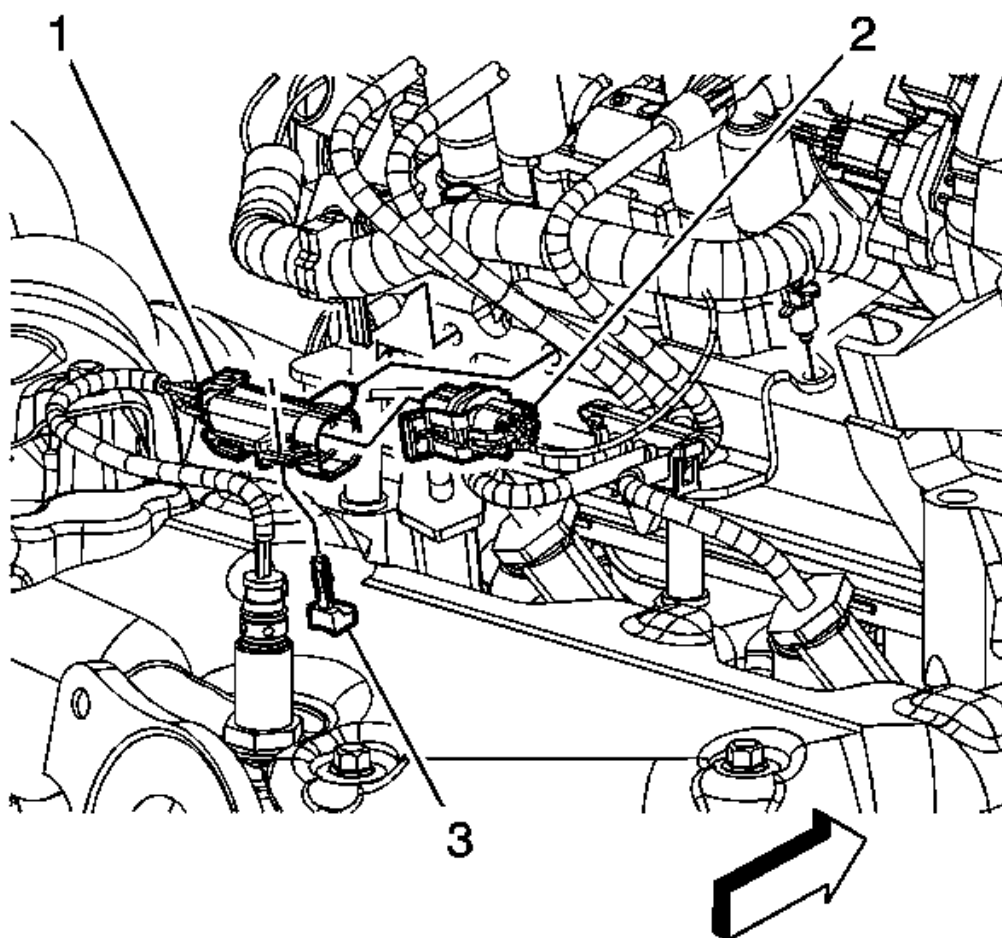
View Of HO2S Electrical Connector Clip & Ignition Coil Bracket
